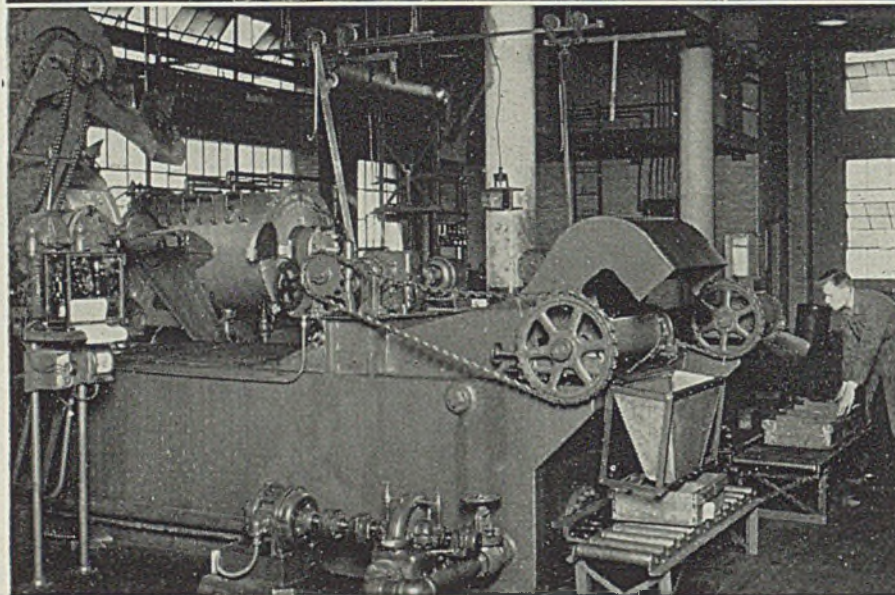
(Bottom)—Pair of smaller rotary-retort units with their quench tanks and drying conveyors. Portion of loading conveyor chute can be seen at extreme upper left
